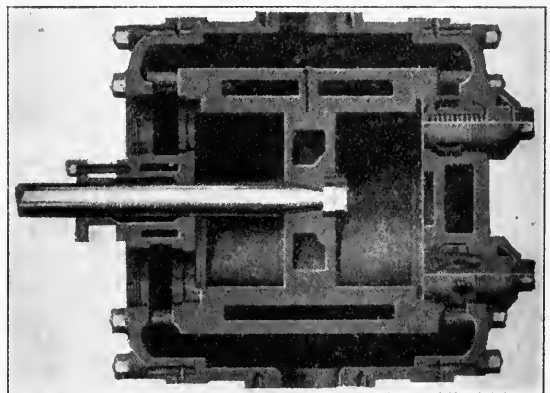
Air Cylinder. Section showing Piston Construction, Water-Jacketing Spaces, and Valve Location.
